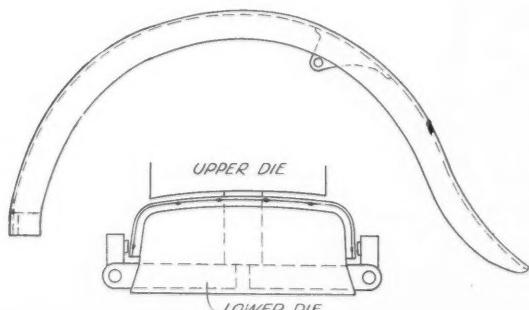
Welding reinforcement to inside of rear fender
